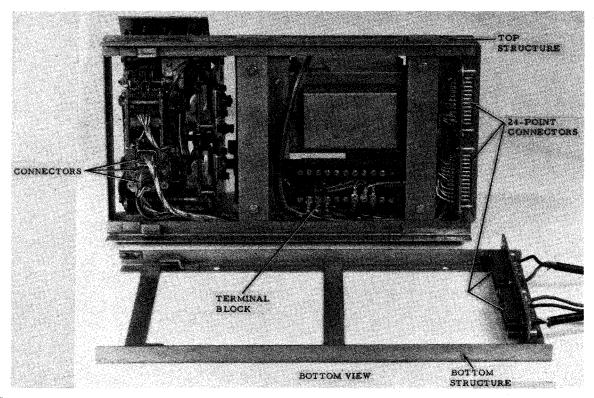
Transmitter Distributor Base - Multicontact, Single Mounting Structural View (Transmitter Distributor and Motor Unit in Place)
